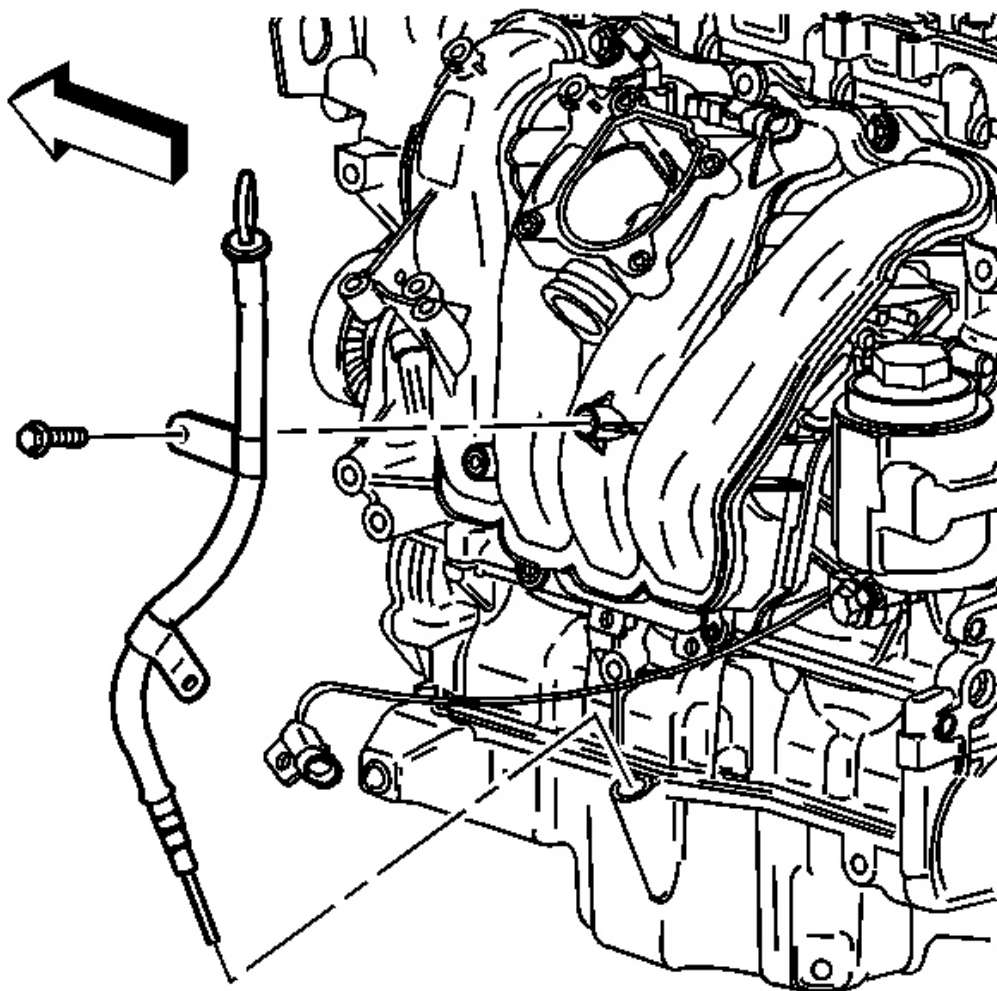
Removing/Installing Oil Level Indicator Tube Assembly & Bolt
